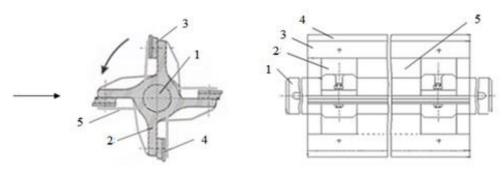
Scheme of the upgraded 5LP linter agitator: 1- shaft, 2- cross, 3- metal blade, 4- rubber, 5- sheet
